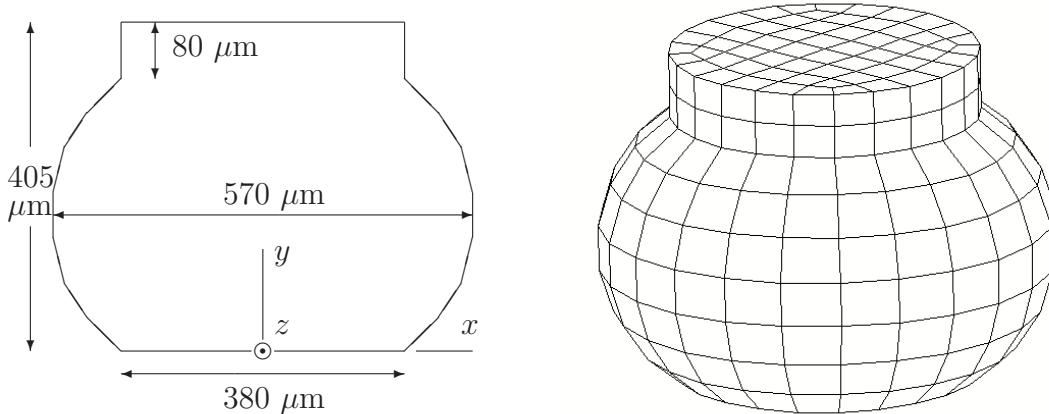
Solder bump; geometry and FE mesh [12, Fig. 12].
